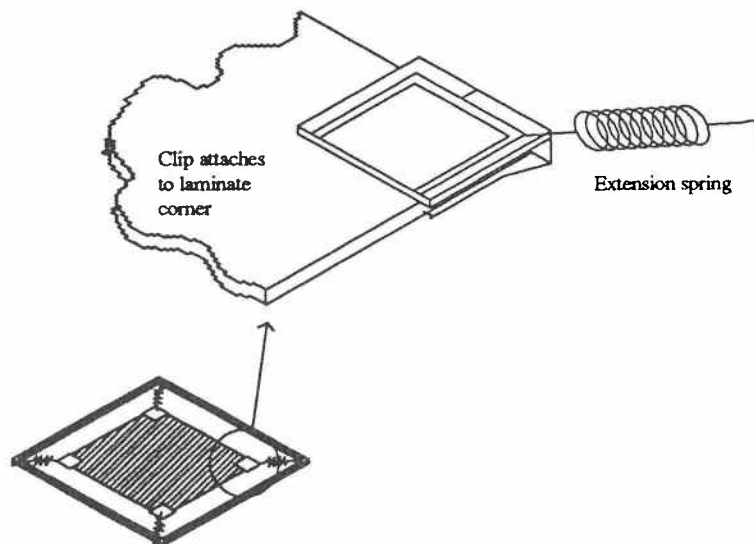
Clamping Mechanism for 90° Bend Part Manufacture
